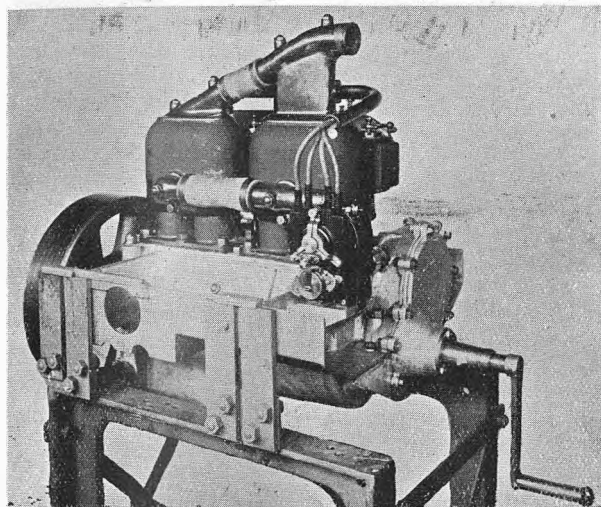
The engine of the 16 h.p. Adams car. The manner in which the aluminium base chamber is cast to afford an undershield is shown. The accessibility of the magneto contact adjustment is evident.
